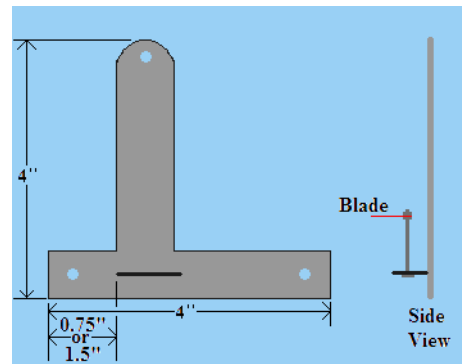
Drawing of custom t-brackets. The blade platform can be seen in the side view. The offset in the mounting of the blade platform is shown with the two dimensions given for the mounting location of the blade platform
